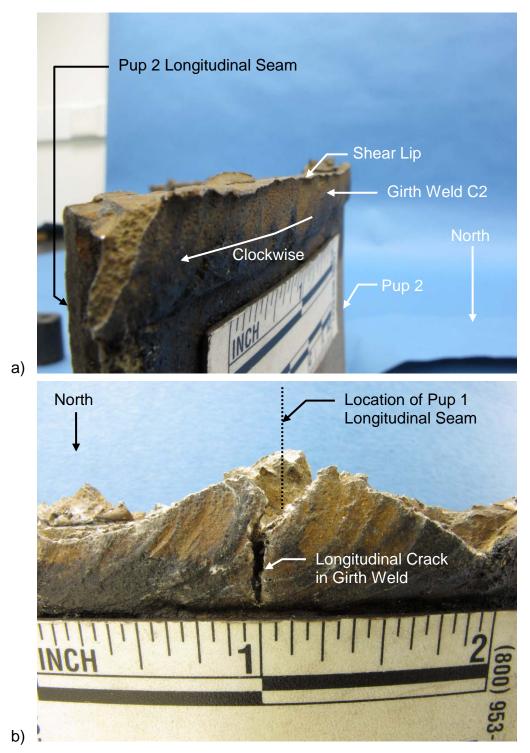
a) Shear lip on girth weld C2 fracture surface approaching the pup 2 longitudinal seam; b) Longitudinal crack in girth weld C2 in line with the longitudinal seam in pup 1.
